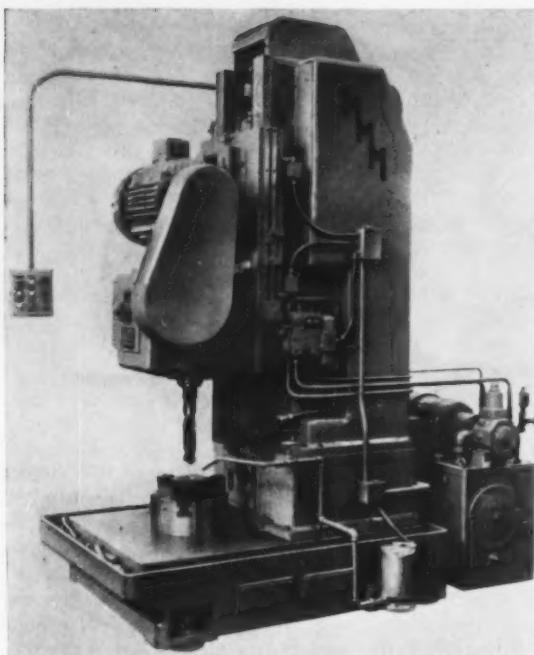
Motch & Merryweather vertical drilling and boring machine
